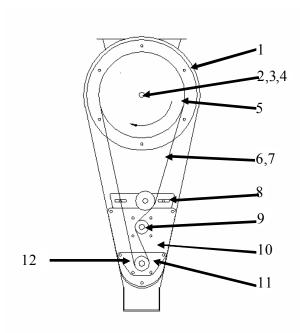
S/SX-Type Chain/Sprocket Assembly
